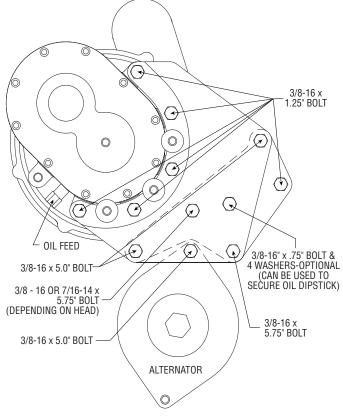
b / Passenger side supercharger mount (69 Mustang)
